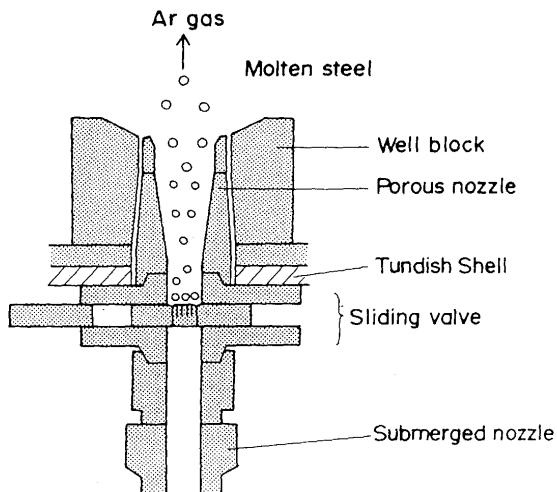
Schematic diagram of molten steel holding technique in the tundish before casting.
